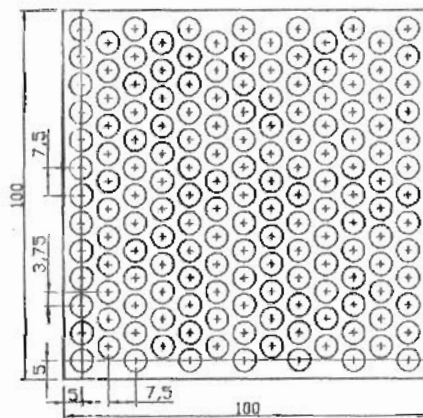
a. Heat exchanger No.(I), 163 tubes, (Staggered arrangement).
